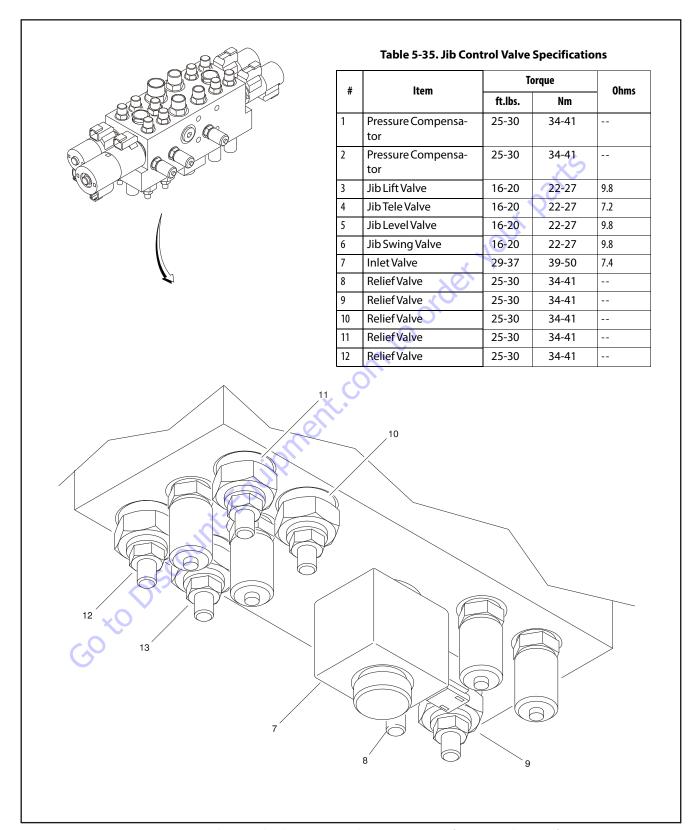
Jib Control Valve Torque and Resistance Specifications - Sheet 2 of 2
